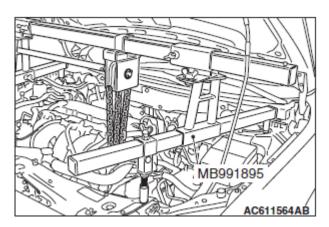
Supporting Engine And Transaxle Assembly Using Special Tool MB991454, MB991928
